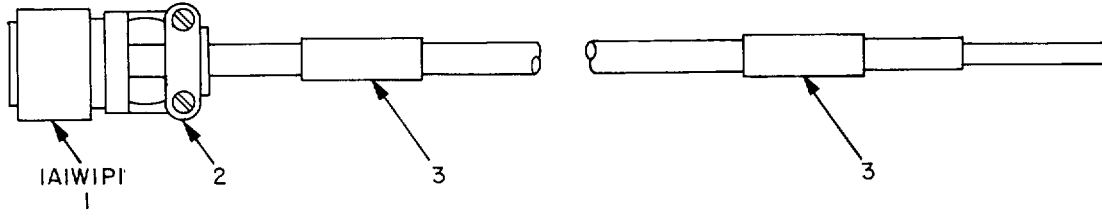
Cable Assembly, Power, Electrical (10 Ft)-1A1W1
